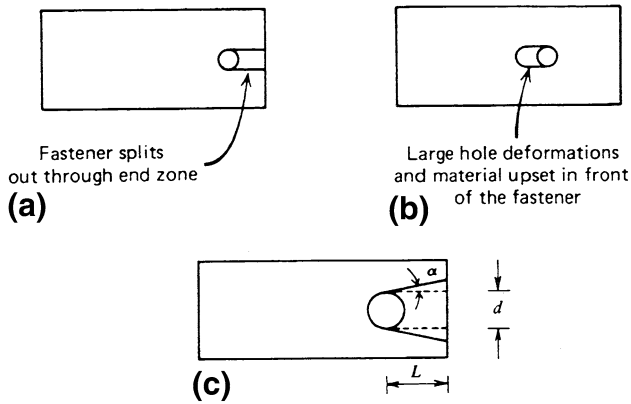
Profile of characteristic failure modes: (a) fastener splits through the end zone, (b) large hole deformation with material upset ahead of the fastener, and (c) path of failure at a bolt hole (Ref 1)
